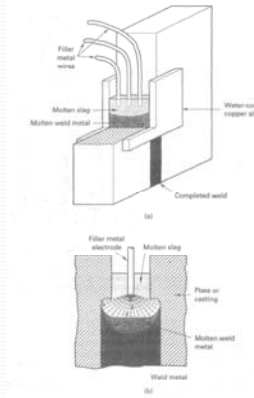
(a) Top arrangement of equipment and workpiece for making a vertical weld by the electroslag process. (b) Cross section of an electroslag weld, looking through the water-cooled copper side.
